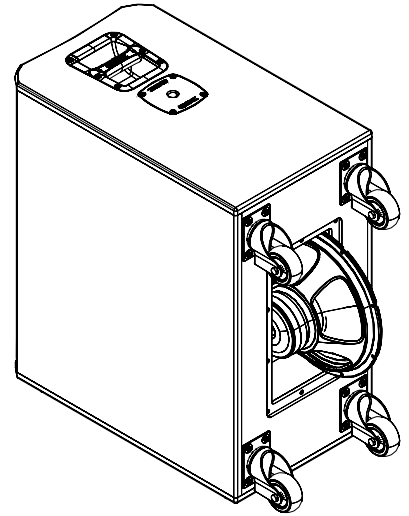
The transducer will fit through the cabinet's BOP cutout
